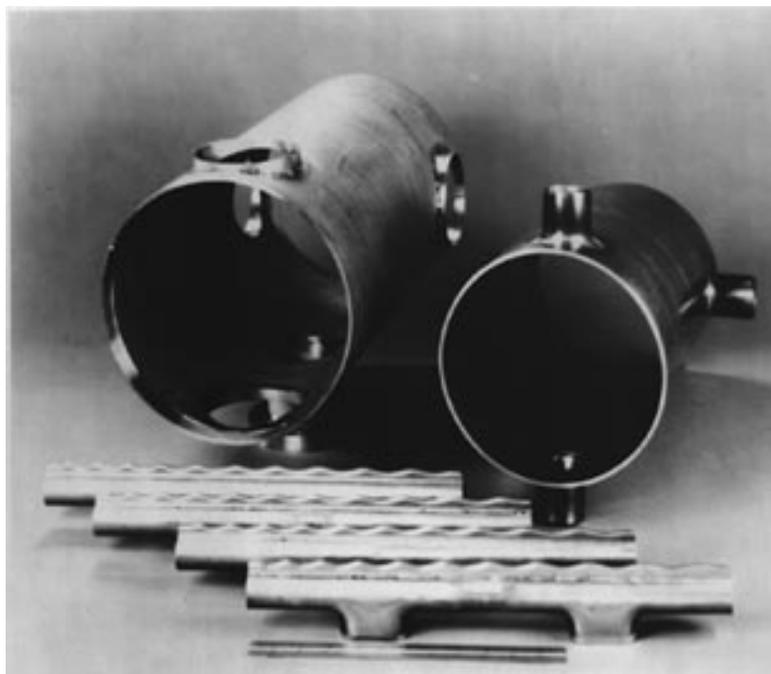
View of the electrodes and the external jackets before the final welding. ( Courtesy of Dr. Kennet Shepard )
